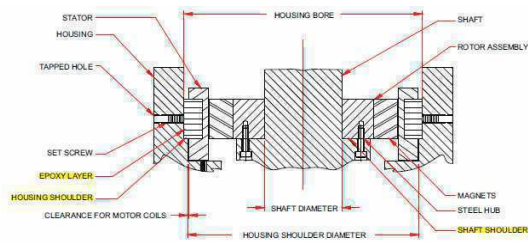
Motor Mounting by Gluing the Stator to the Housing
